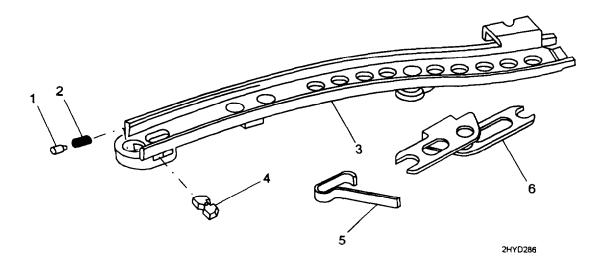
Group 0801 and 0802 Feed Cam Assembly, PN 11699814, and Feed Lever Assembly, PN 7269119
